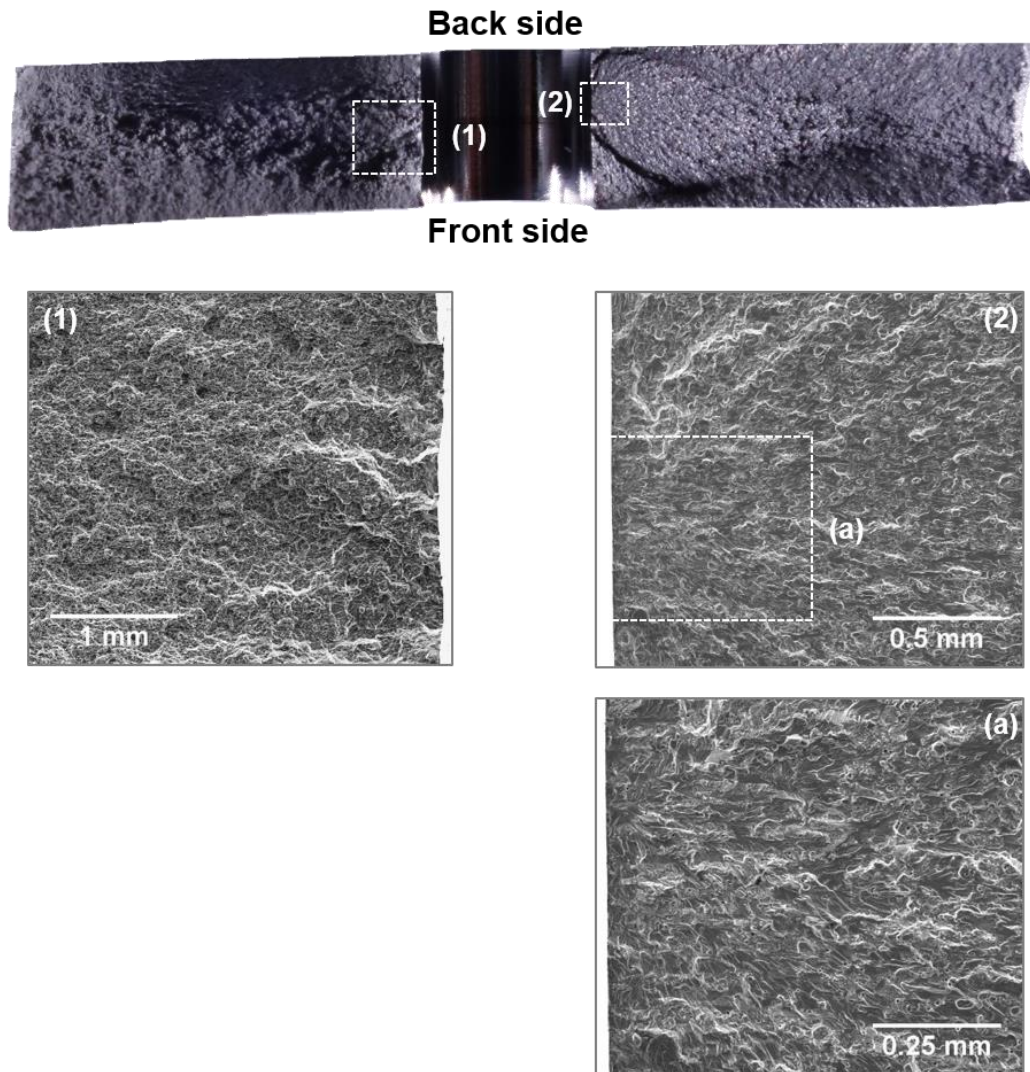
Fracture surface morphology of the un-expanded specimen, U4. The optical micrograph on top shows the whole fracture surface. SEM images on the right show the origin of fatigue crack initiating from right edge of the hole. Image (a) shows the zoomed-in view of the crack initiation site in Image 2. SEM image on the left highlights the typical morphology which results from fast fracture.
